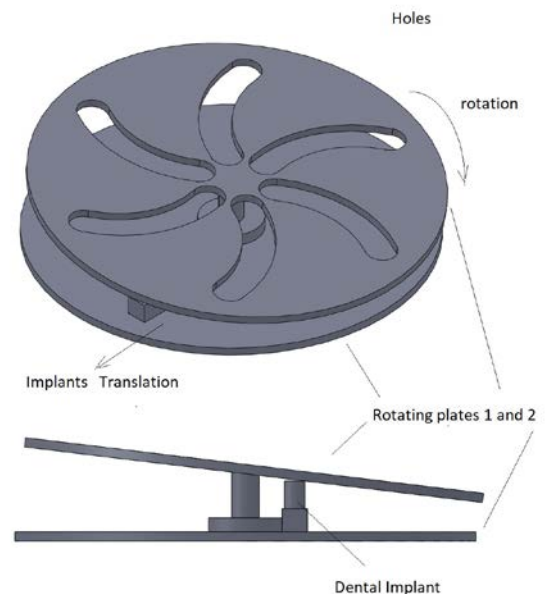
Fatigue testing- Principle of test machine. The plates are rotating and the implant can be shifted partially.
